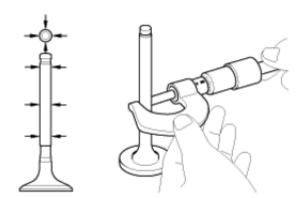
Measuring Diameter Of Valve Stem Courtesy of HYUNDAI MOTOR CO.
